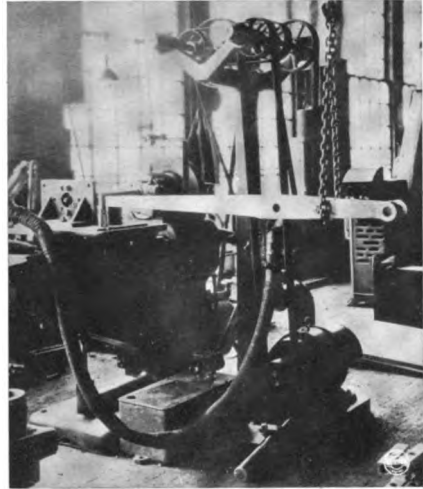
Grinding Small Holes in Radius Rod Ford Locomotive Valve Gear
